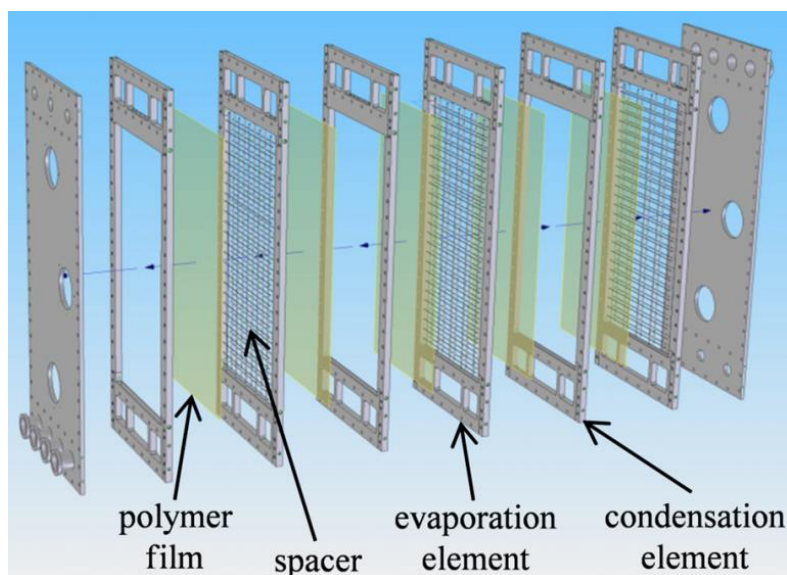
Exploded assembly drawing of the falling film plate heat exchanger with PEEK film heat transfer surfaces and spacers(Christmann, Krätz et al. 2013)
